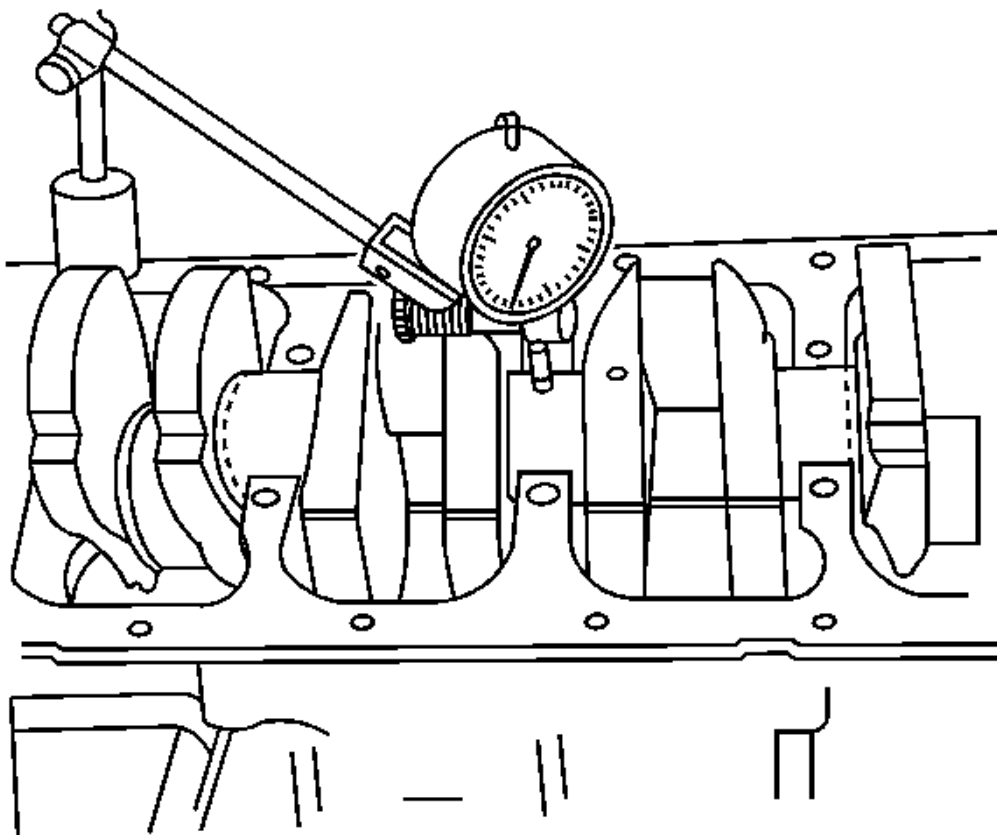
View Of Middle Crankshaft Journal Runout Check
